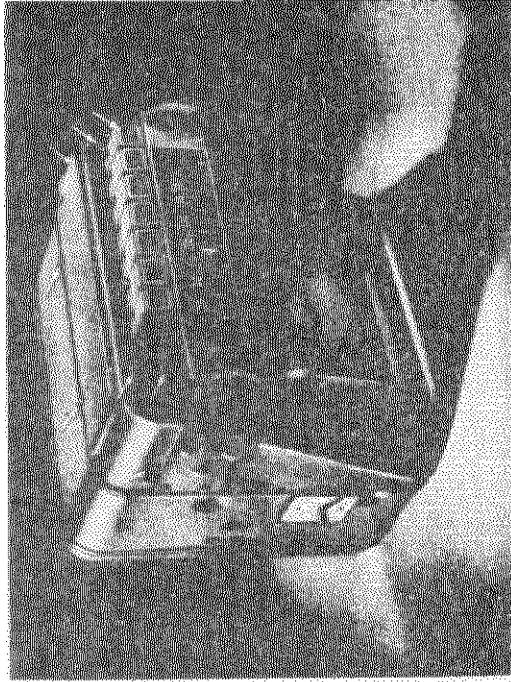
Remove these 8 Screws to Disassemble tuner cover
